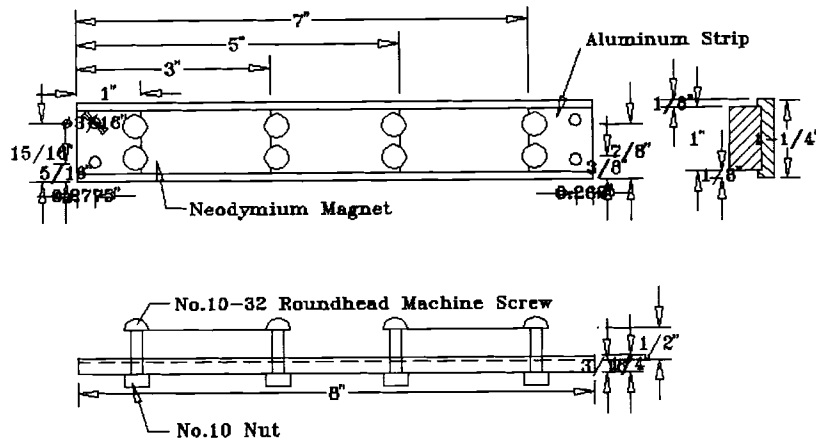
Magnet-Carrying Aluminum Strip, Part #27
